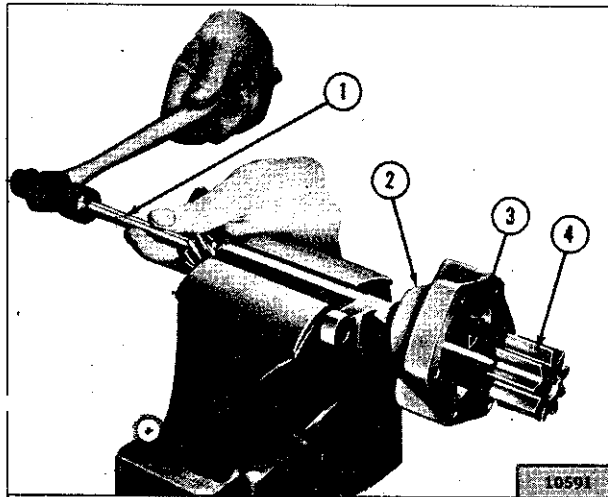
REMOVING OIL PUMP DRIVE SHAFT AND GEAR
